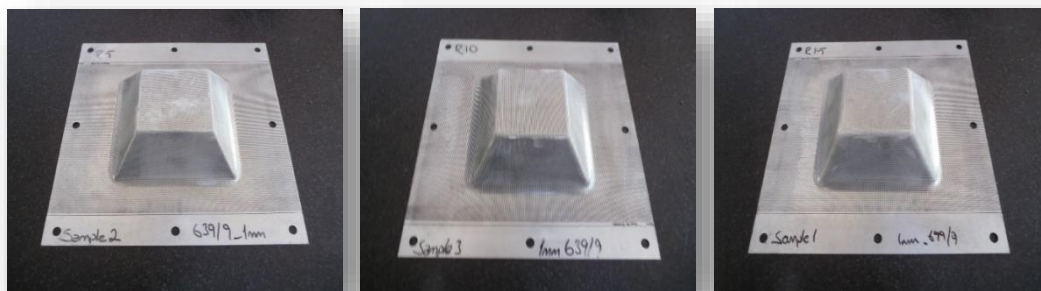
The formed parts in which 5 mm, 10 mm and 15 mm tools are used illustrated from left to right.
